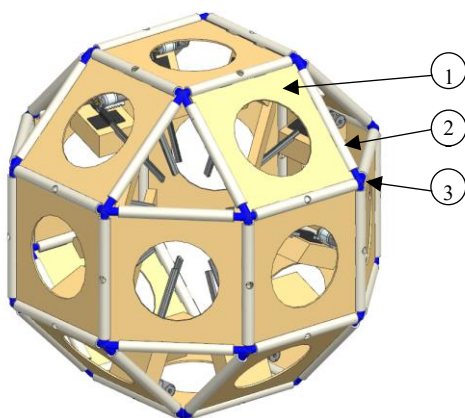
CAD rendering for main chassis assembly. Main components labelled.
